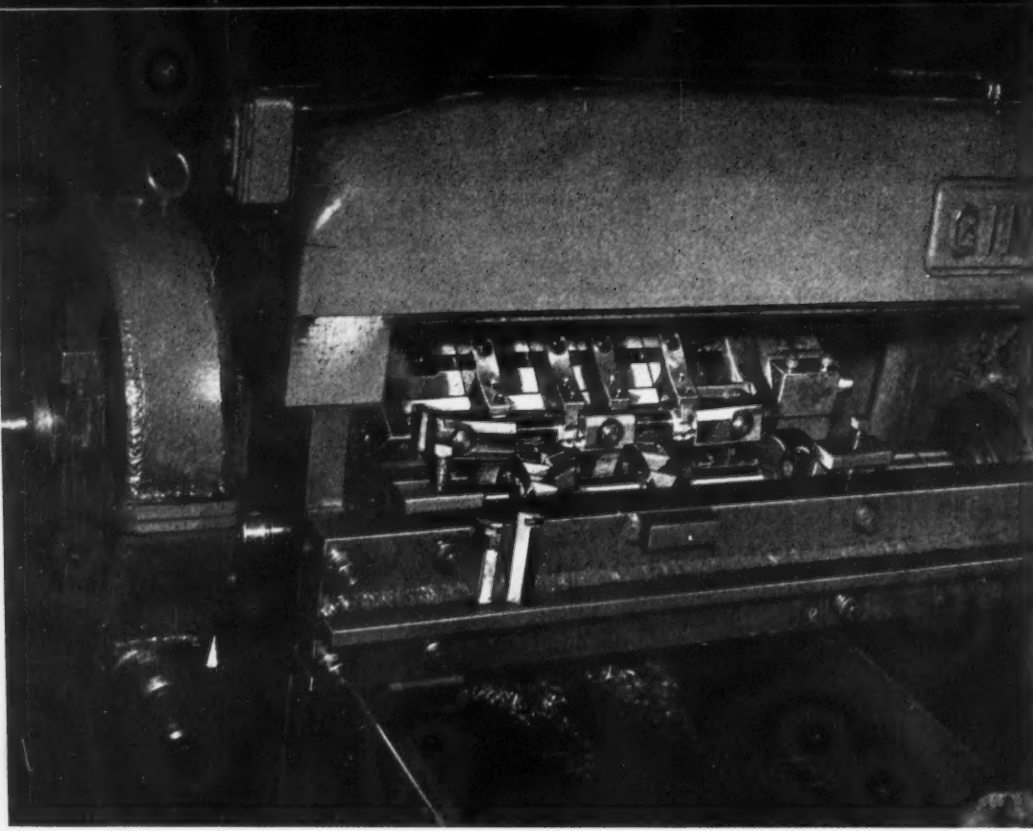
Rear View of Milling Machine Shown in Fig. 12. Cutters, Rollers and Cam-plate Lobes are Visible. Blade with Finished Contour and Blank before Milling are Seen in the Fore-ground of Illustration
